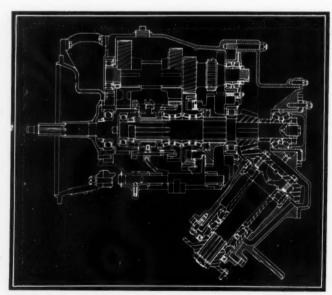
Longer propeller shaft is possible with the angular outlet of this transmission
